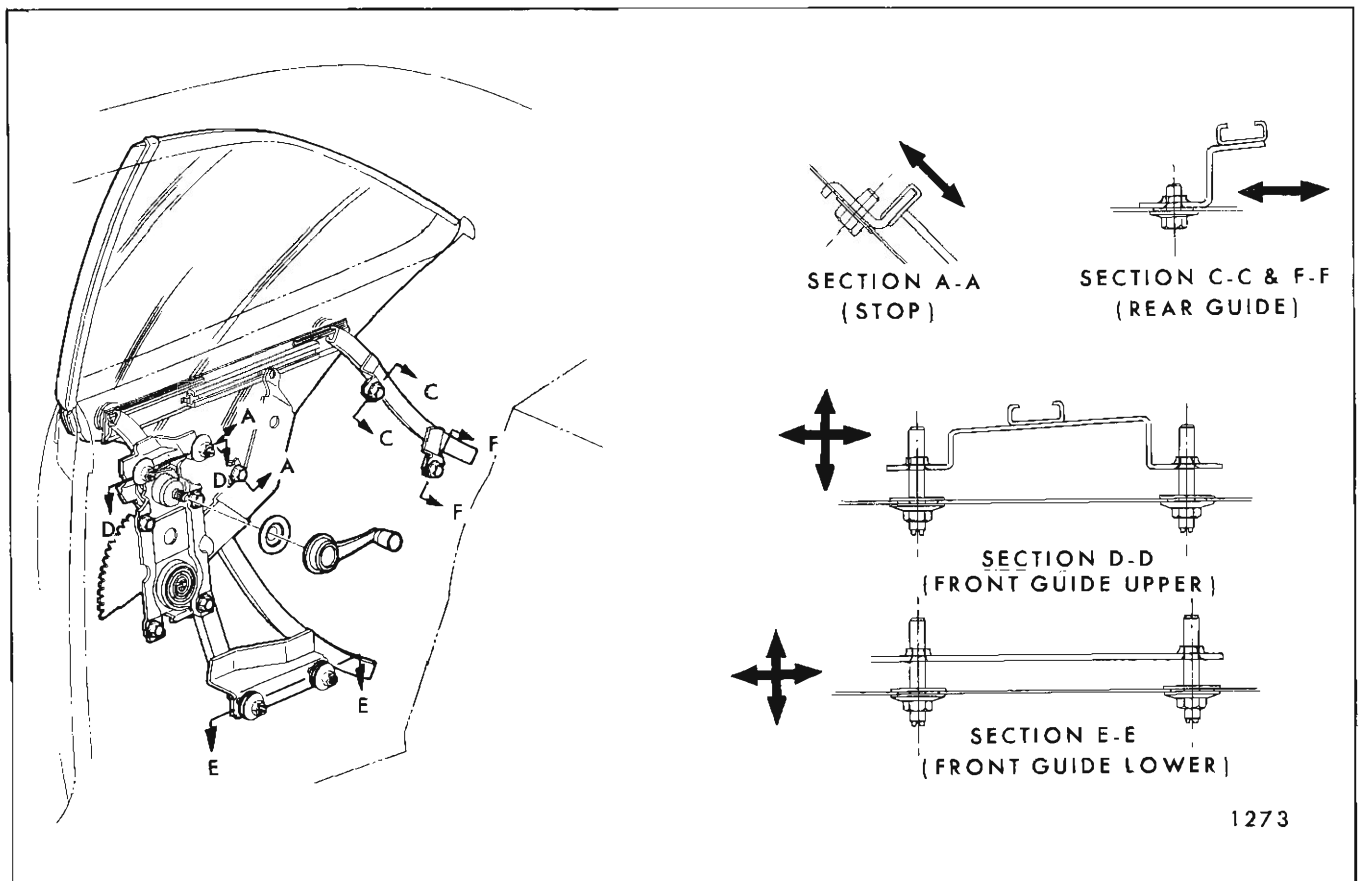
E9—"37" Rear Quarter Window Adjustments (Arrows indicate adjustment direction available)
